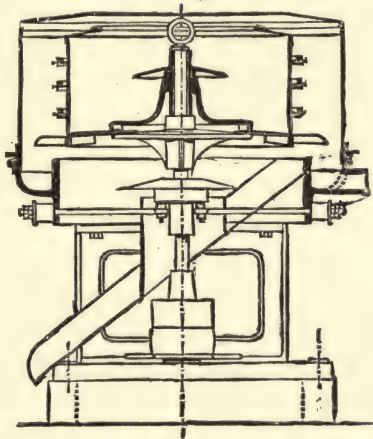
Section of Centrifugal Machine with Bottom Discharge.
